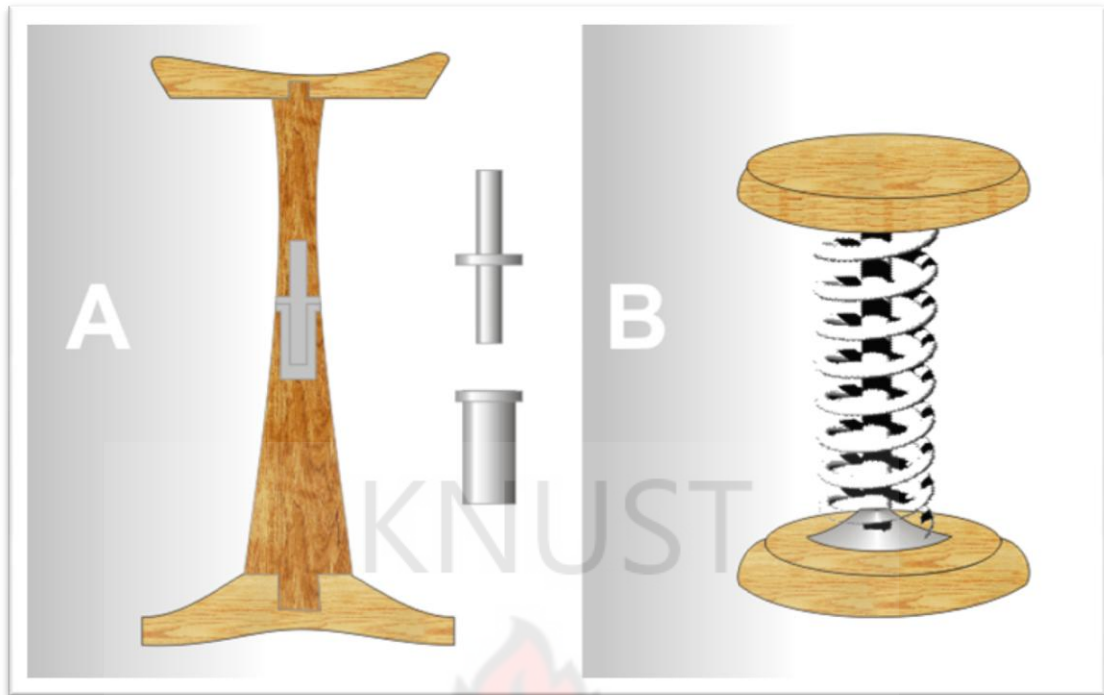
Cross section of a wood stool (A) with a swivel mechanism and B- a wooden stool with a spring mechanism.
